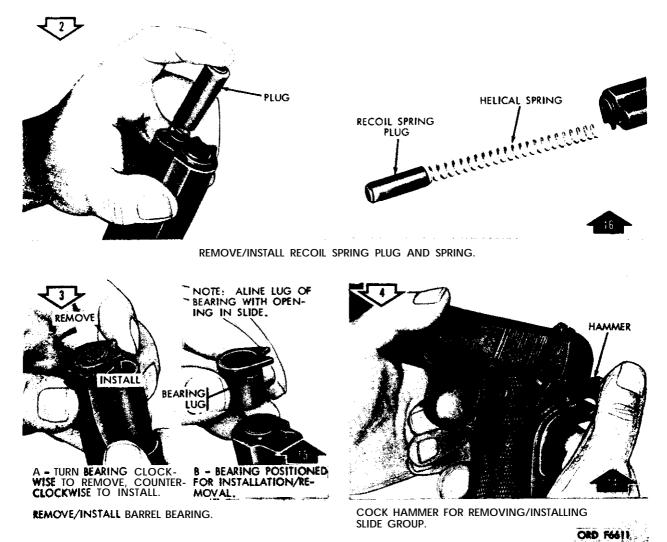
Disassembly/assembly of barrel and slide group (1 of 4).
